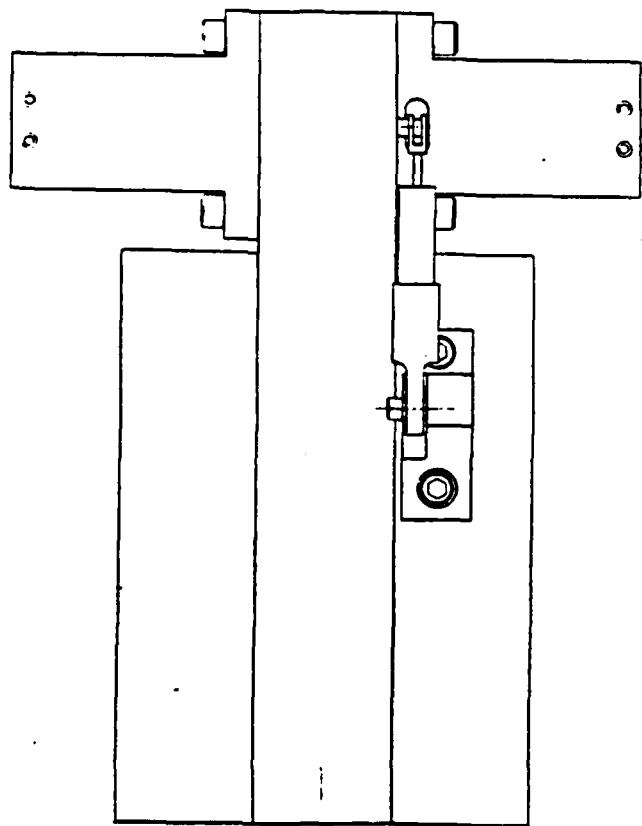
1.25 INCH ACTUATOR - LOAD TEST FIXTURE
